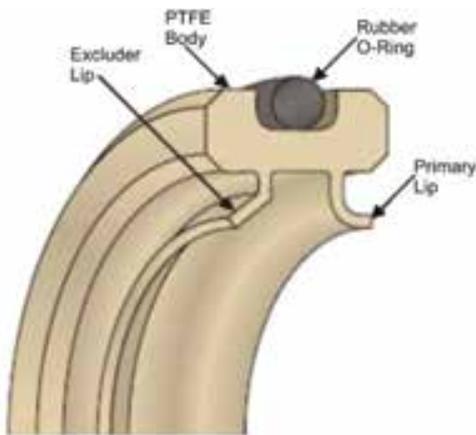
The custom-designed seal manufactured for the sluice gate wheel assembly.
